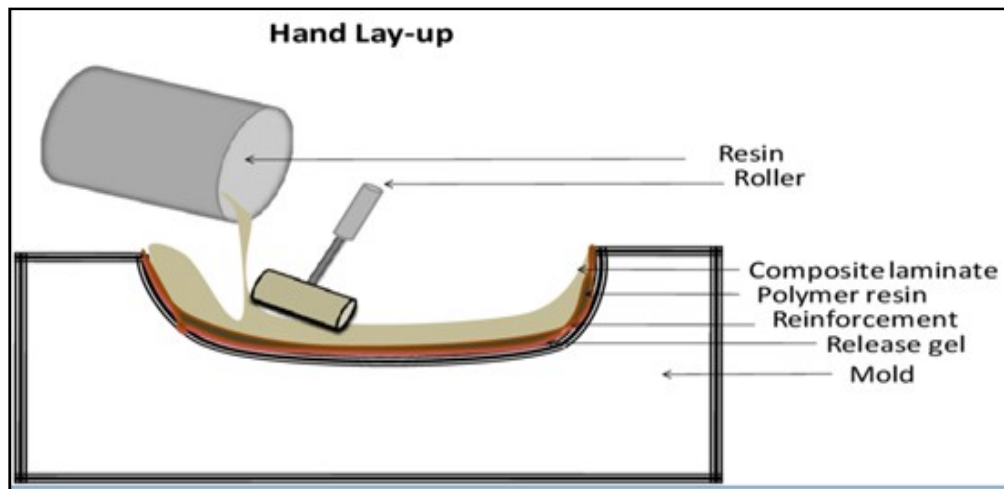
Hand Lay-Up Technique (Hakeim et al., 2016)
